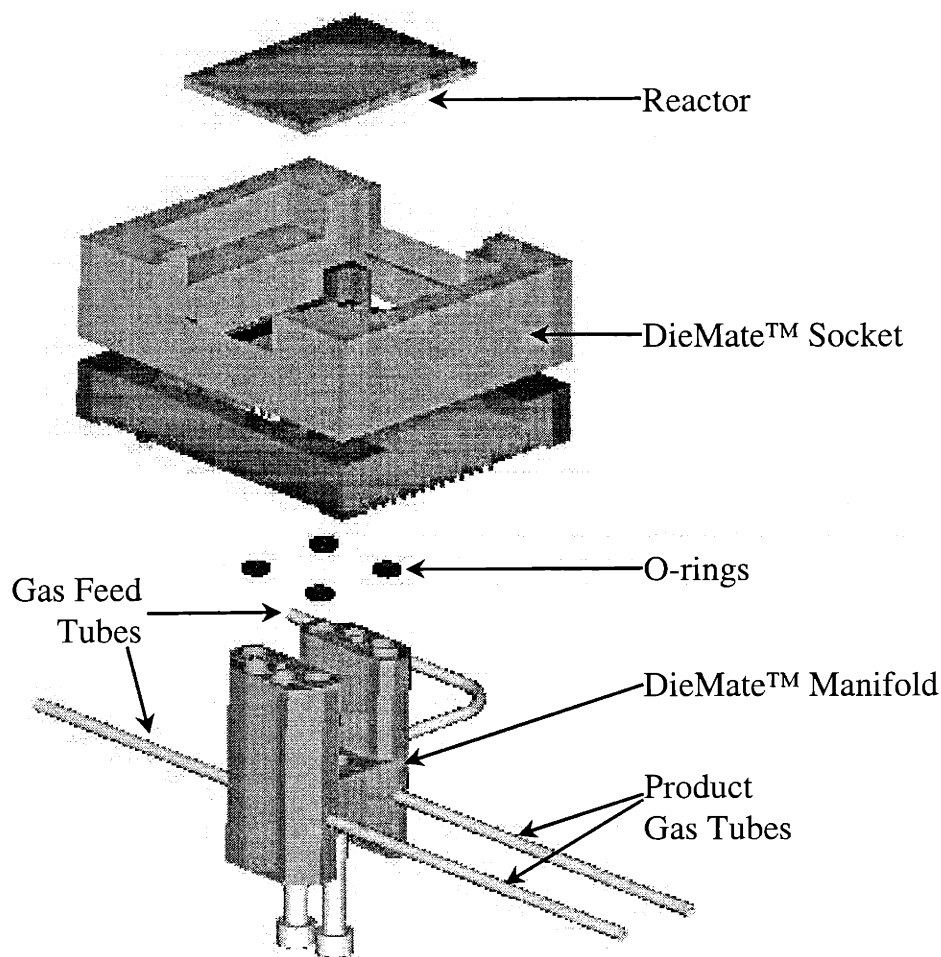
Exploded view of the DieMate™ packaging assembly.
